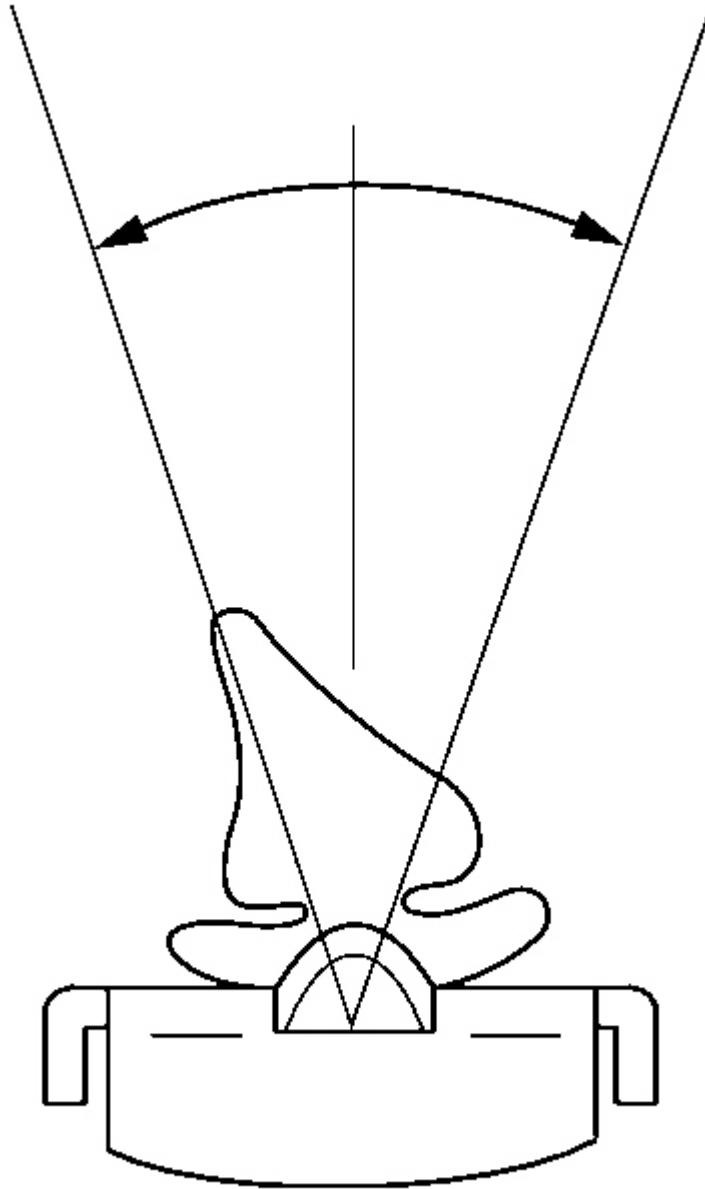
Measuring Wiper Blade Element Centerline Contact
